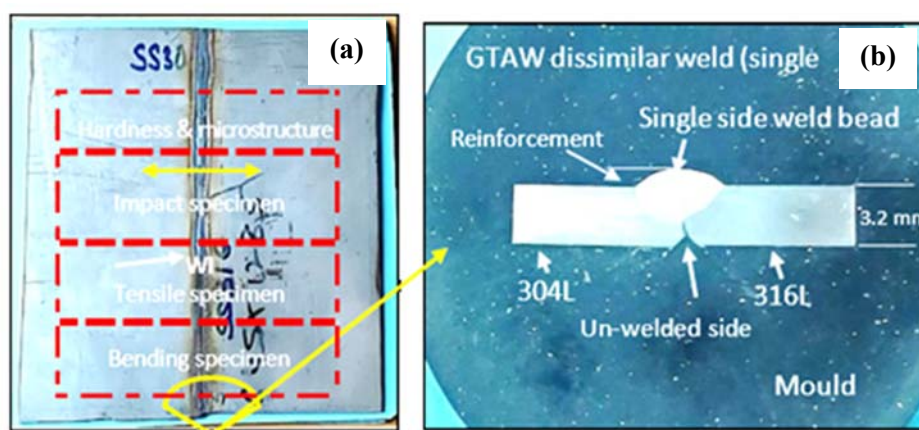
The welded joint: a) prepared dissimilar weld joint; b) prepared specimen on a mould for macrograph and showing weld bead
